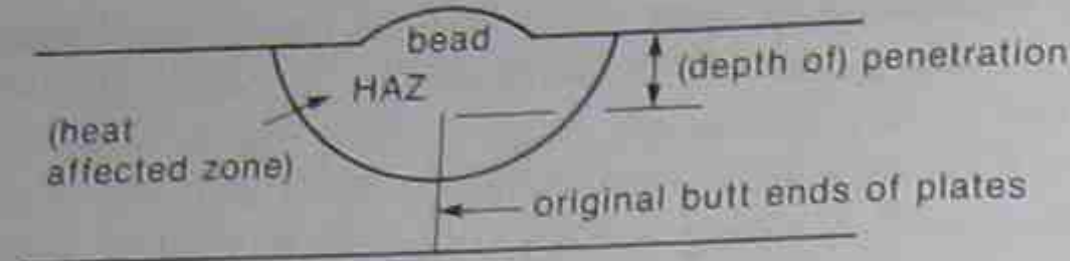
Sketch of the cross-section of a weld, joining two thick plates.
